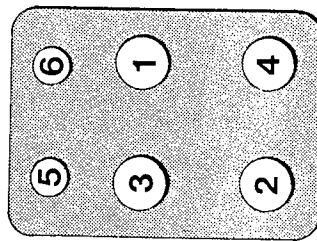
Tightening sequence for cylinder head bolts and cylinder head nuts
